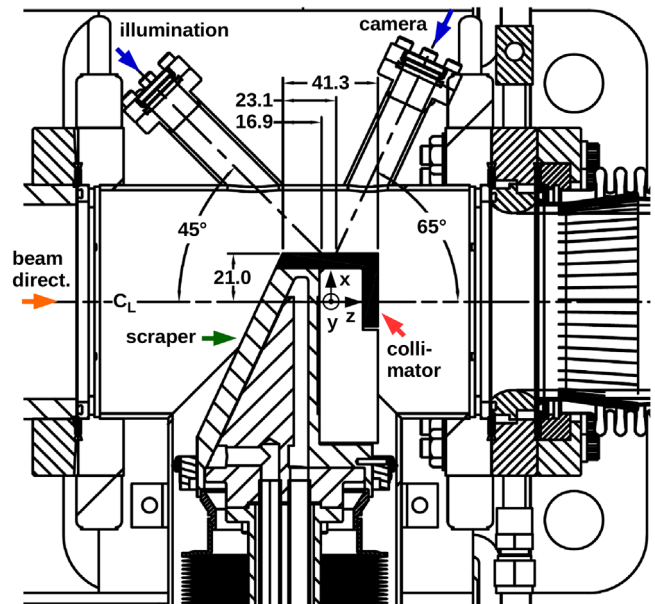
Horizontal collimator assembly plan view. The collimator test pieces are stacked in the y direction so that only one is visible in this view; in addition, the collimator pieces are shown fully inserted, past the centerline. In the experiments, the collimators are withdrawn to a parking position allowing the beam to circulate. Dimensions are given in mm.
